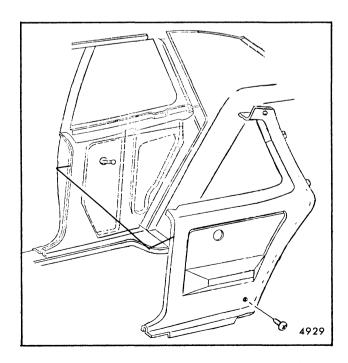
Quarter Trim Assembly Attachment - "X" Styles
